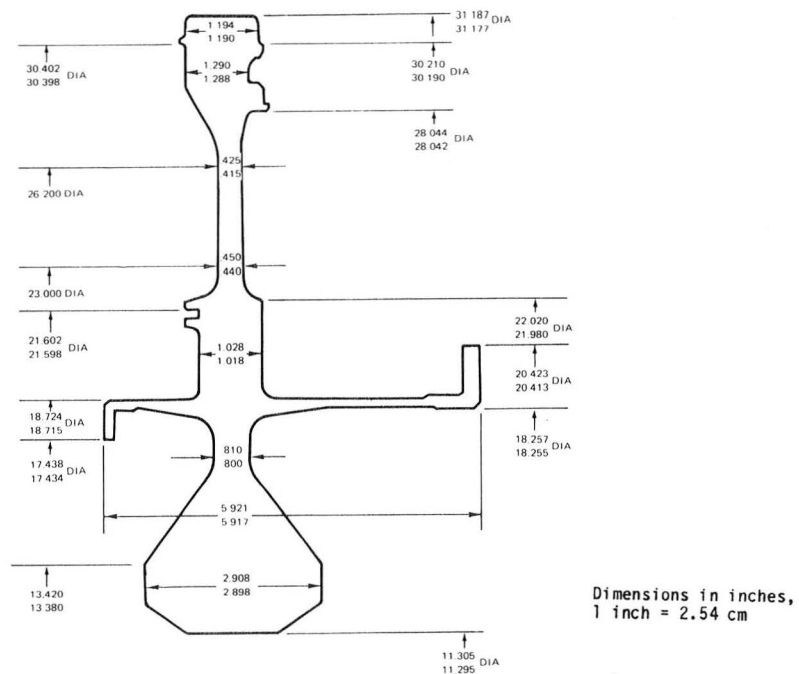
Principal Dimensions of JT9D First Turbine Disk P/N 812901
